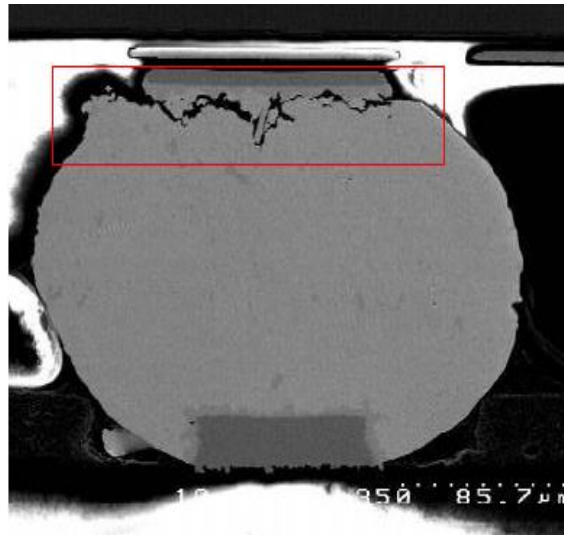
Experimentally Cracked Solder Joint
